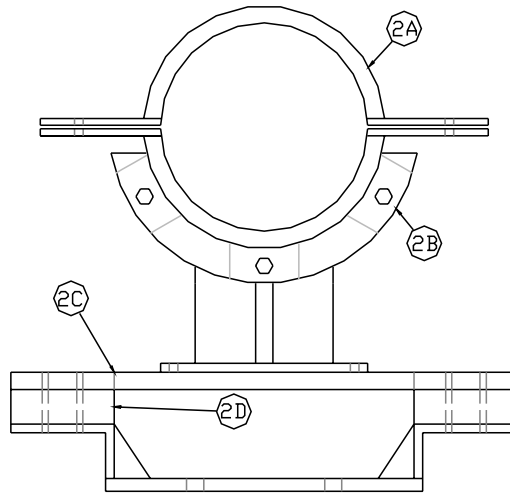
Adjustable stand for ejector tubes (#2 on assembly drawing).
